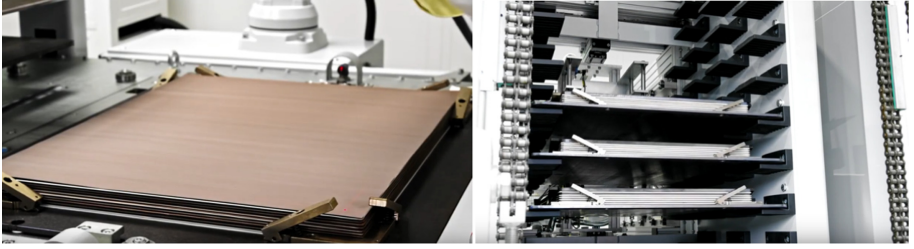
PCB fabrication: lamination and curing cycle. Pre-assembled stack-up (left) and 20 positions loader of a Lauffer press. (Courtesy of Somacis, Italy)
